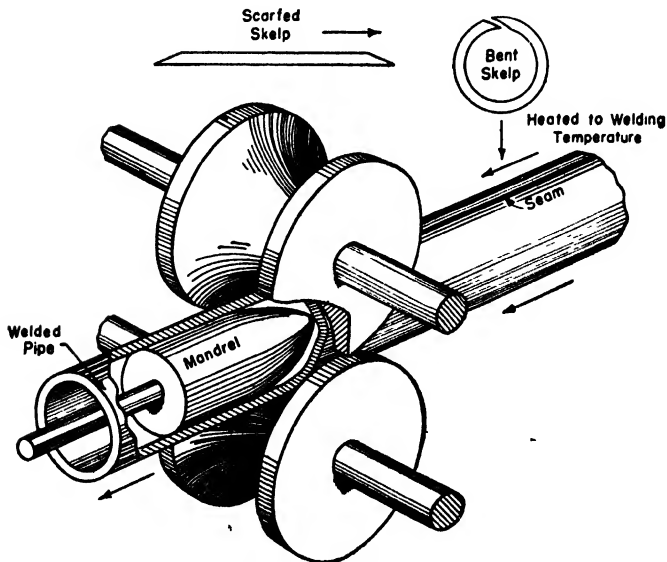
Lap welding by rolling seam over mandrel.
